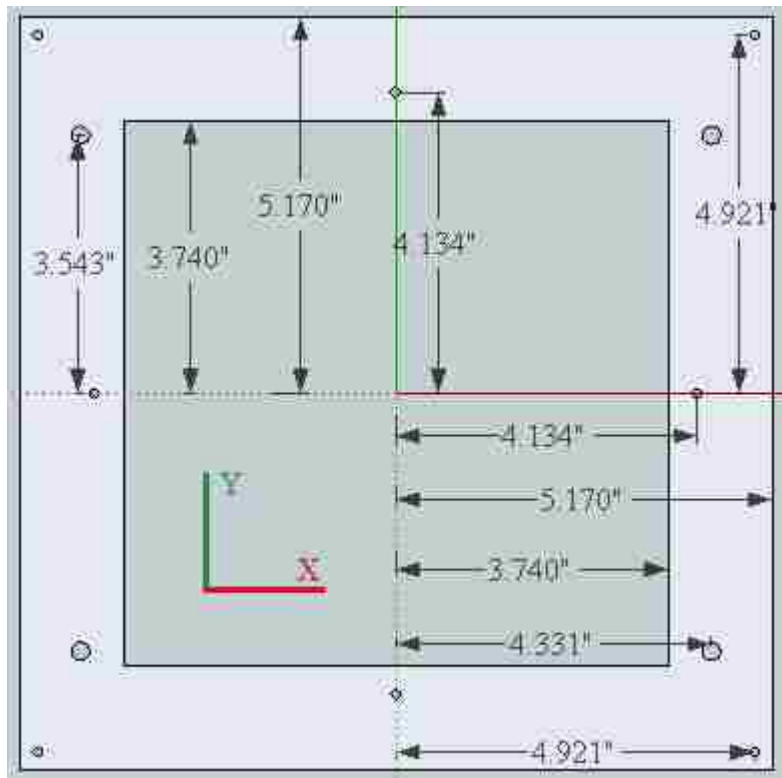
Top view of the 20x20 cm² lower trimmer aluminum plate illustrating the in-plane and cross-plane dimensions. The lower trimmer is square, such that all non-hole dimensions are equal in the in-plane and cross-plane dimensions.
